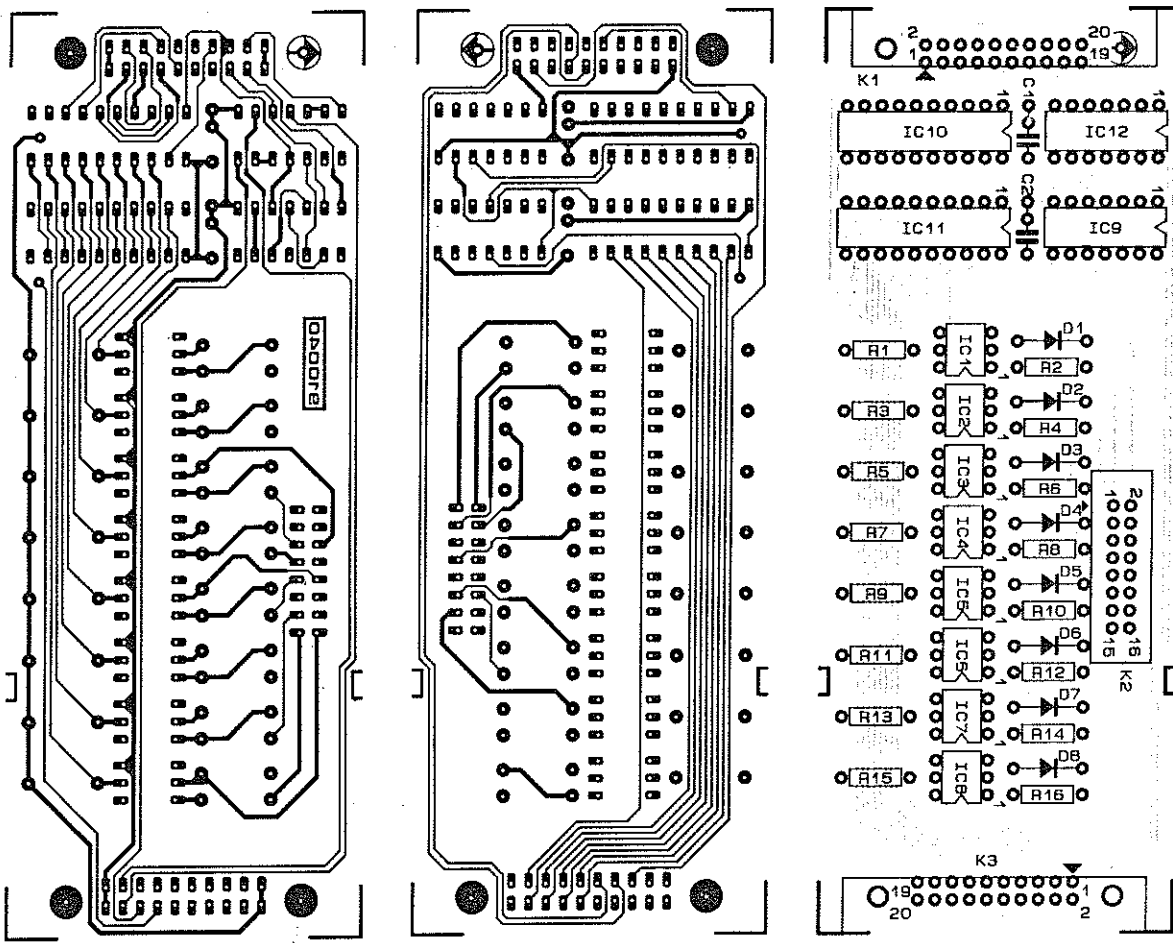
Track layouts (mirror images of the component side and the solder side) and component mounting plan of the double-sided PCB for the opto interface.
